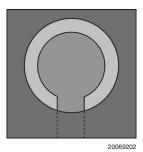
Non-Solder-Mask-Defined Pad Layout on PCB
